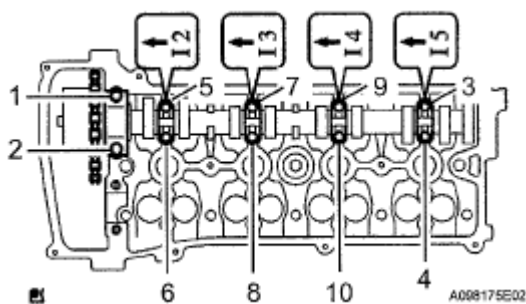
Identifying Bearing Caps Bolts In Sequence
